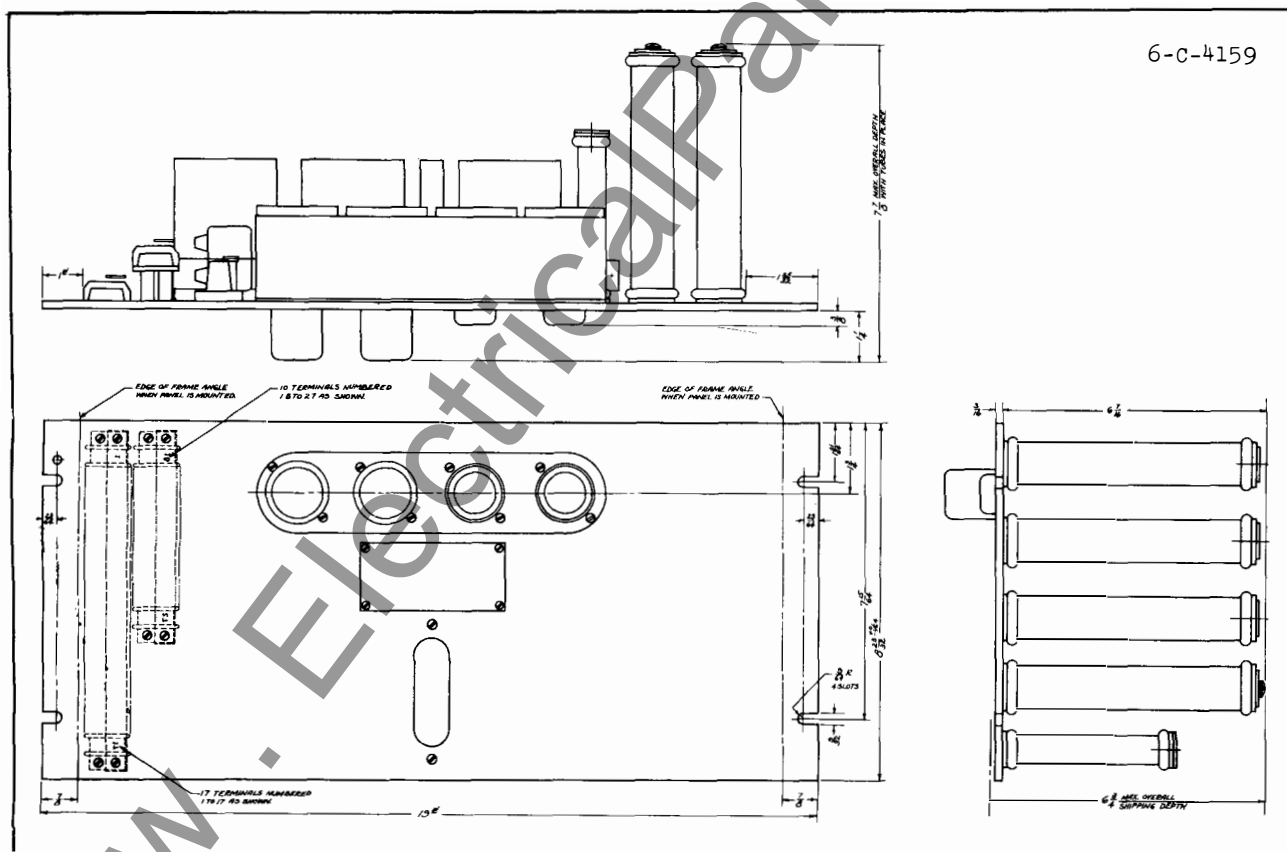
Outline And Mounting Plan Of The Type HKB Control Unit For Type JY Carrier. For Reference Only.
